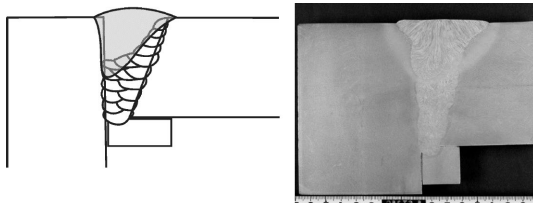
Example of cross section of multi-pass corner welding joint by CO₂ arc welding and double electrode submerged arc welding mixed method (Steel thickness: 80 mm)
